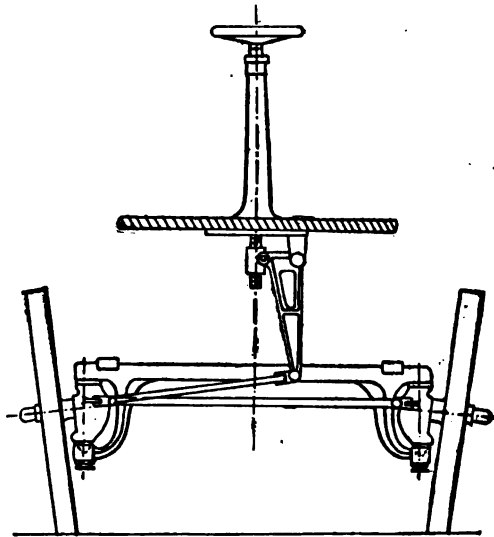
Steering Arrangement of the Clarkson-Capel Steam Wagon. The spindle of the steering wheel carries a screw at its end, which works a boss, as the wheel is turned, thus actuating the lever and drag-link attached to the arm of one of the axle pivots.
